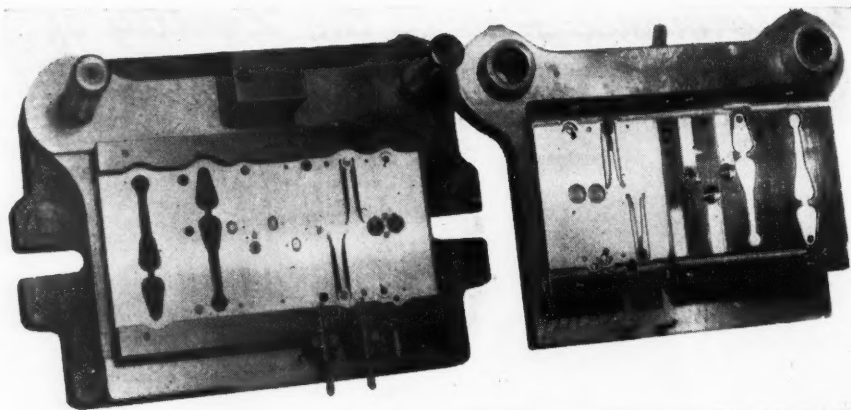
At left is shown a progressive die built of steel sections. At right, the face of the punch holder, showing the punch bodies surrounded by the stripper plate. This die produces the work shown in the preceding illustration.
